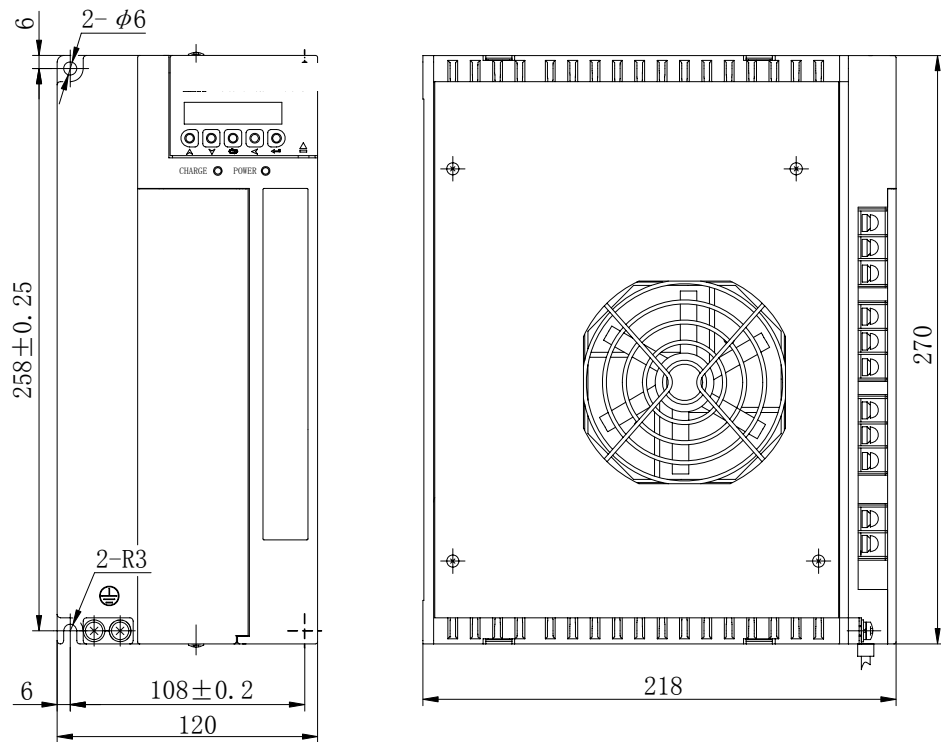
Appearance dimensions of GE2075T/GE3050T (unit: mm)
